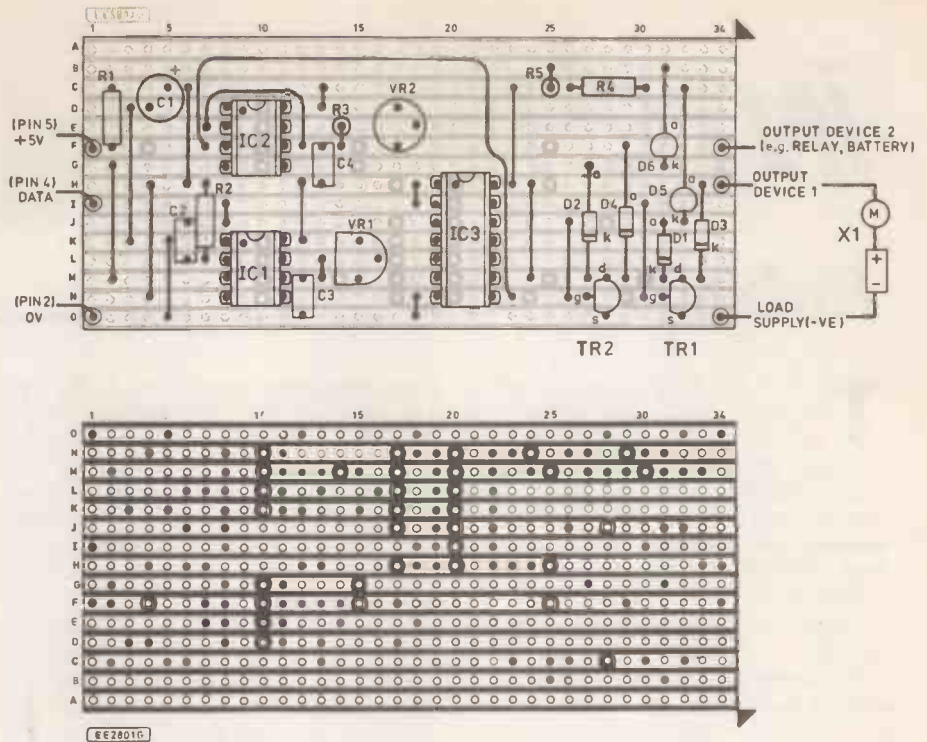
Stripboard component layout and details of breaks required in the underside copper tracks.
